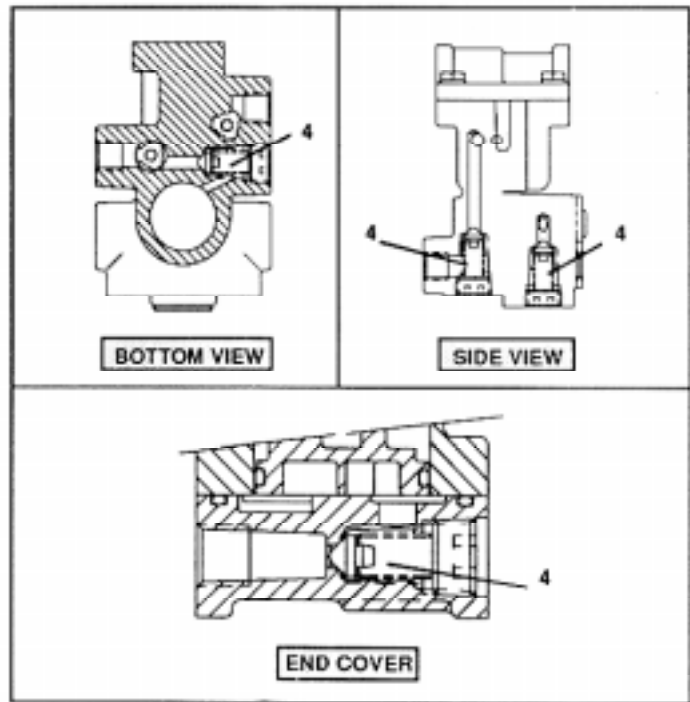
LOCATION OF 4 CHECK VALVE ASSYS.
